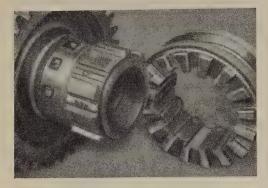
Shaft (on left) and ring with claws (on right) of the reverse gear clutch showing the formation of spot welds after the film of lubricating oil had been destroyed.
